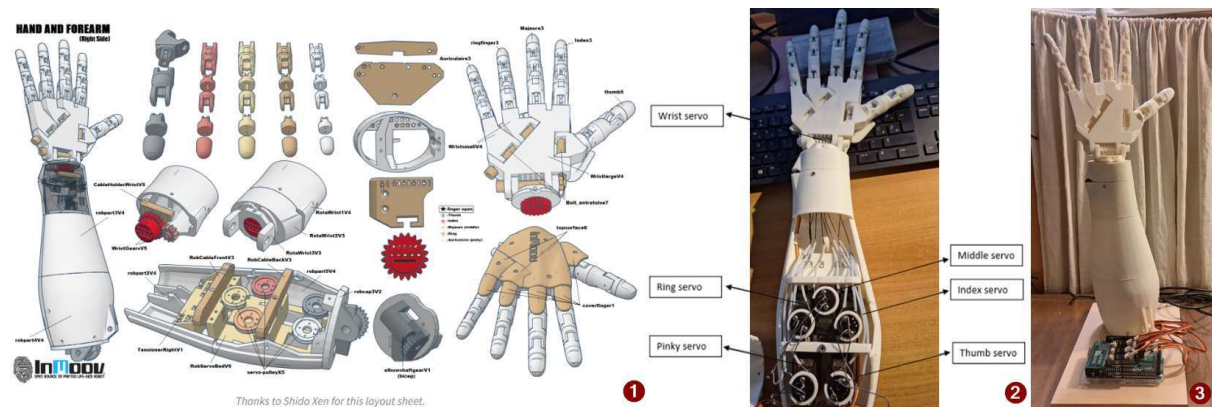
① Hand and Forarm pieces from InMoov [22]. ② Assembled hand with connected lines to servos. ③ Whole hand mounted on the wooden board.
